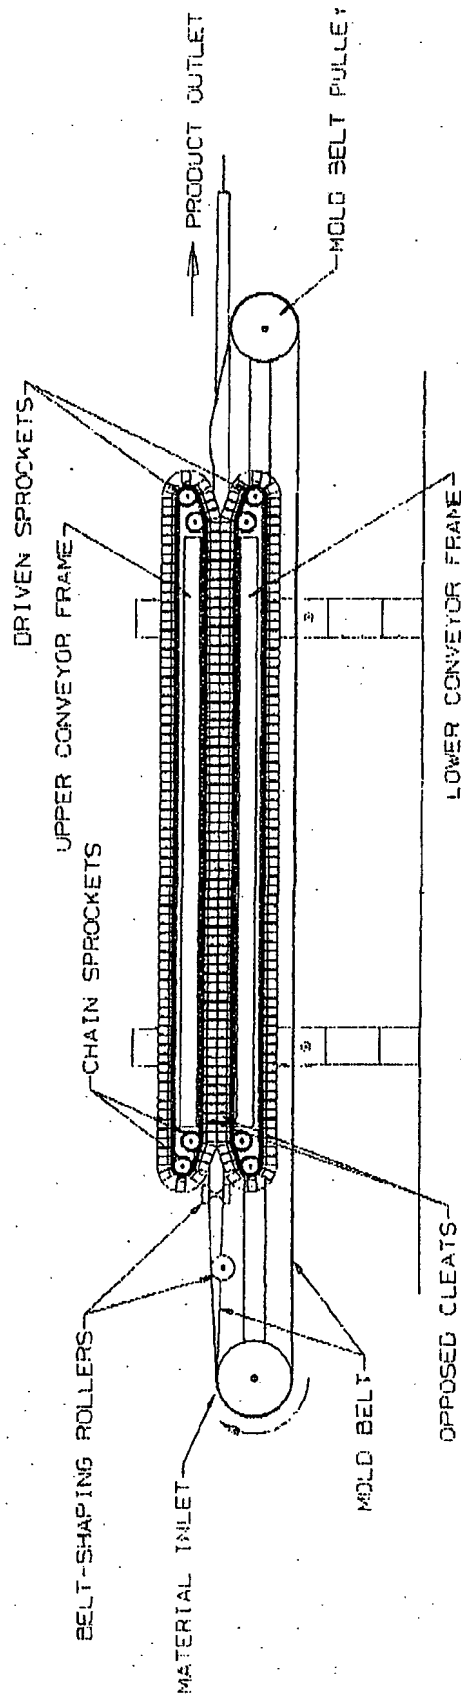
SIDE VIEW OF FORMING APPARATUS USING A SINGLE FLAT MOLD BELT AND CLEATED CONVEYORS.
